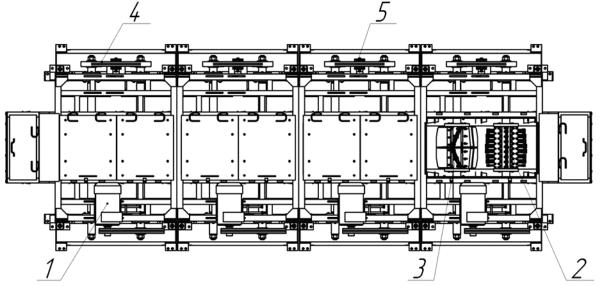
Four section rotary mixer (top view): (1) electric motor; (2) cable rotor; (3) blade rotor; (4) V-belt transmission; (5) tension roller
